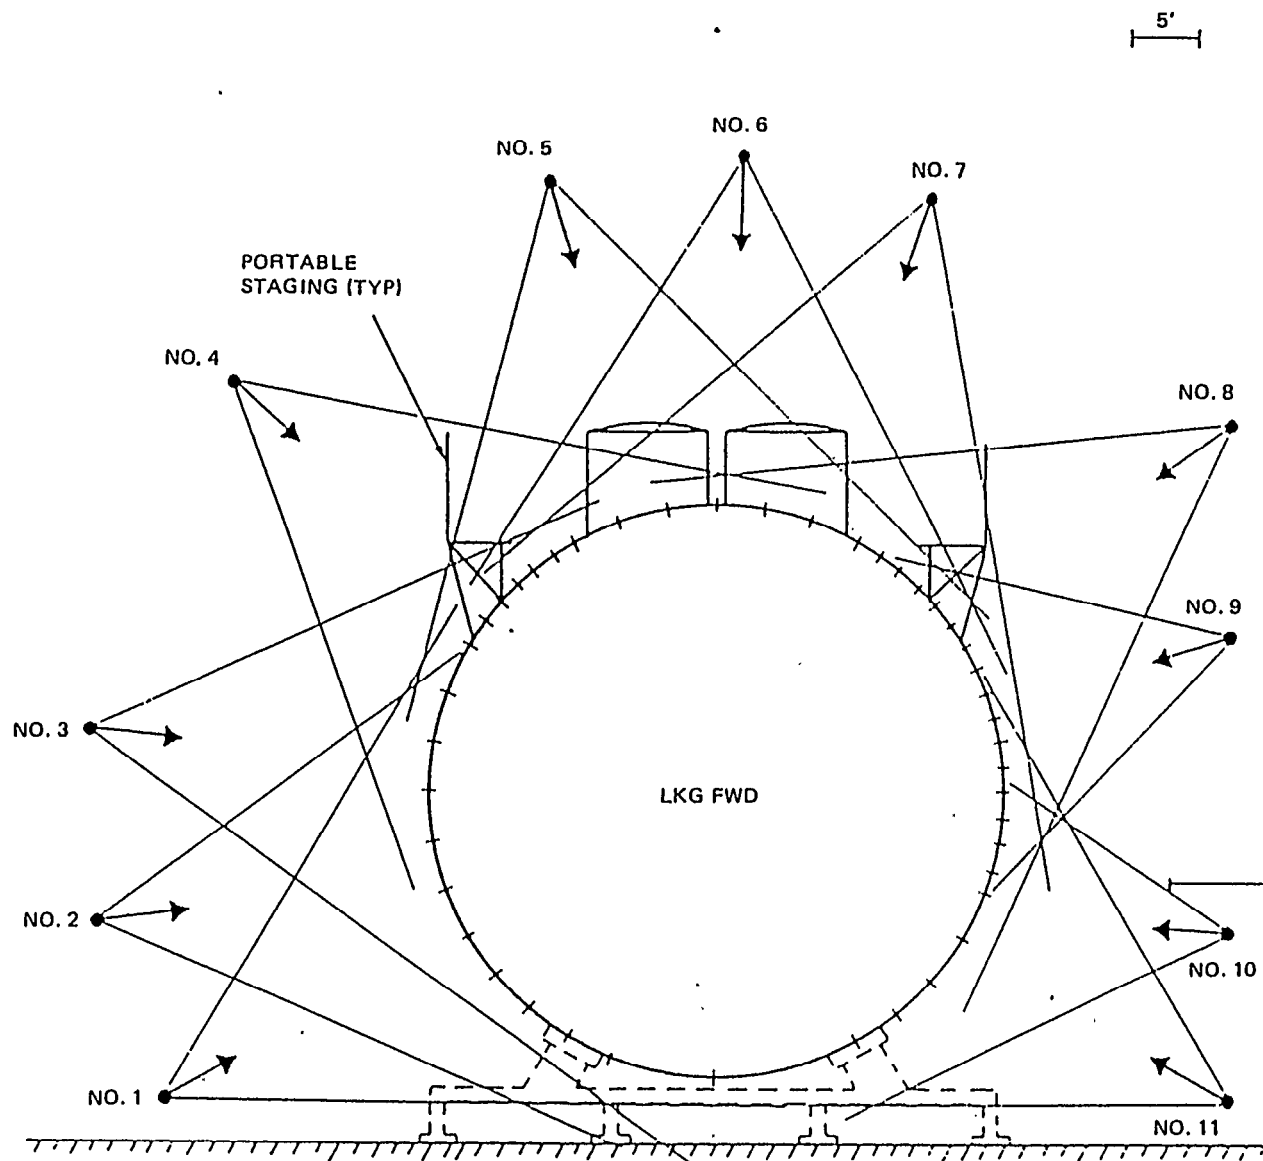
Photographic Plan for the Trident Hull Typical Transverse Section
